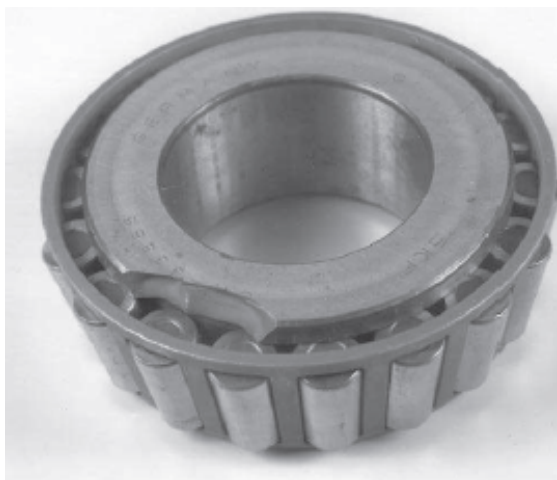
Fracture on the large shoulder of a tapered roller bearing inner ring resulting from rough treatment
